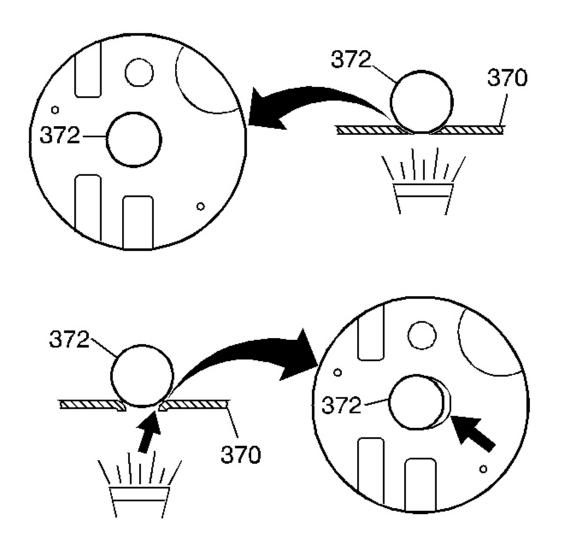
Inspecting Valves For Excessive Peening Courtesy of GENERAL MOTORS CORP.
